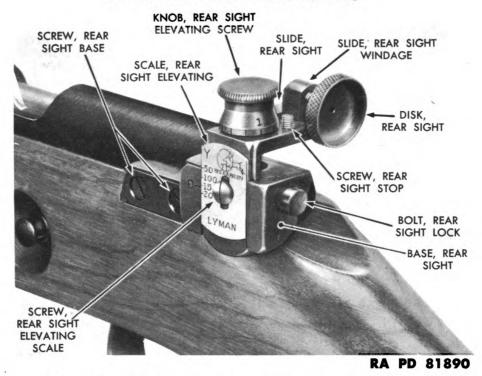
Rear Sight Assembly Mounted on Winchester Rifle, Cal. .22, Model 75 — Left Rear View
